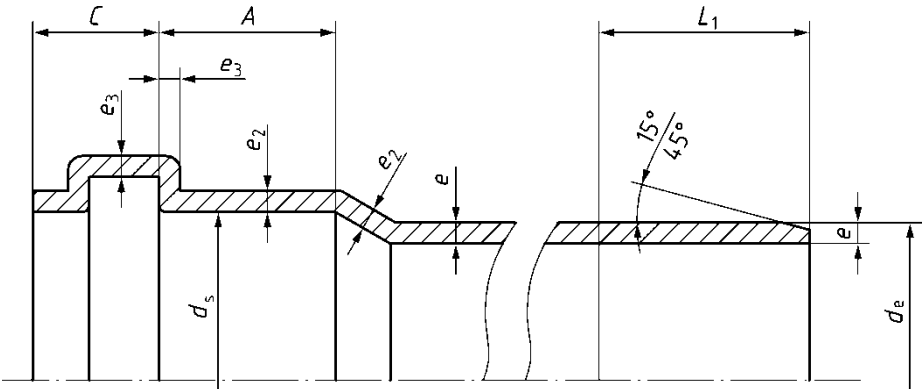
General dimensions of sockets and spigot ends with elastomeric sealing joints
